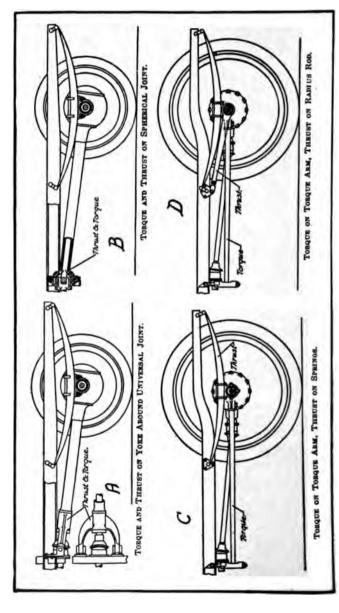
Conventional Method of Taking Driving Thrust and Braking and Driving Torque in Modern Automobiles.
